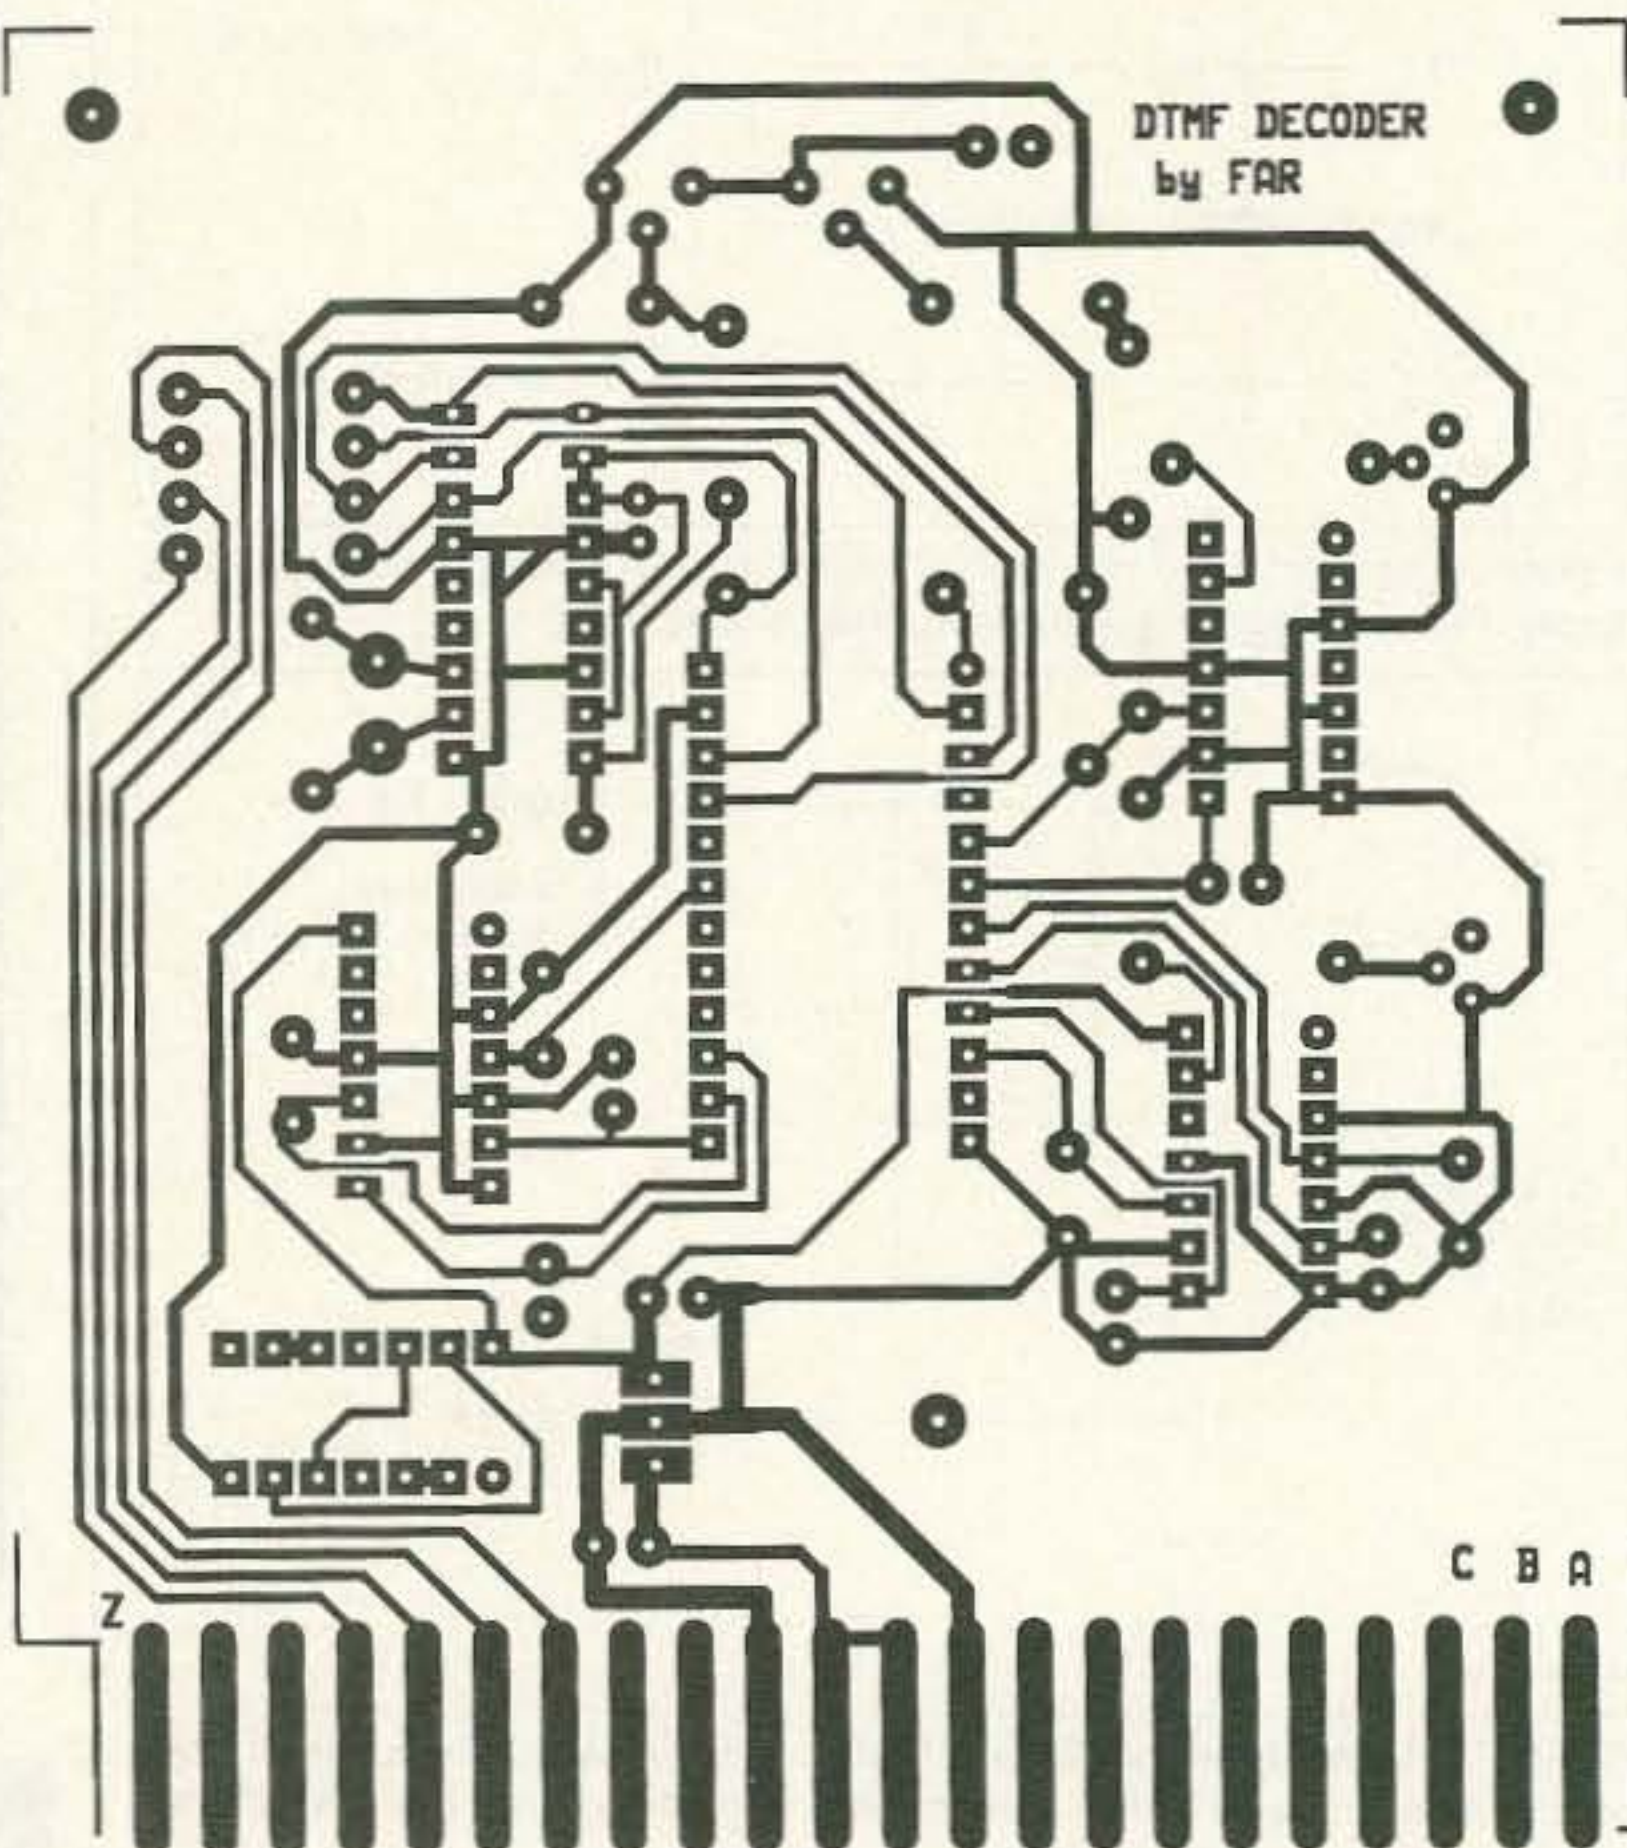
Touch-tone decoder PC board foil pattern (bottom layer).
